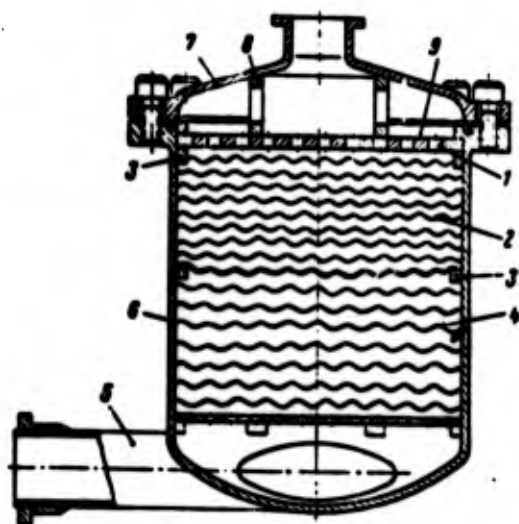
PGG with catalyst in the form of grid: 1 - plate; 2, 4 - packs of metallic grids; 3 - rings; 5 - outlet pipe; 6 - reactor housing; 7 - housing cover; 8 - scattering device; 9 - cavity above the plate.
